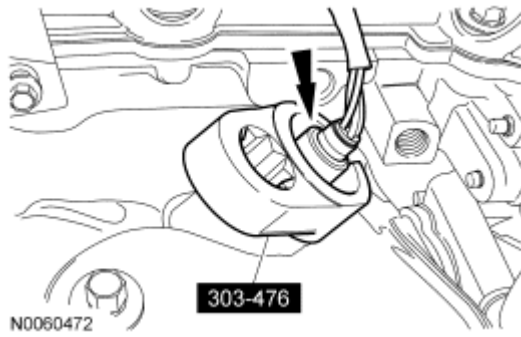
Identifying RH HO2S & Special Tool (303-476)
